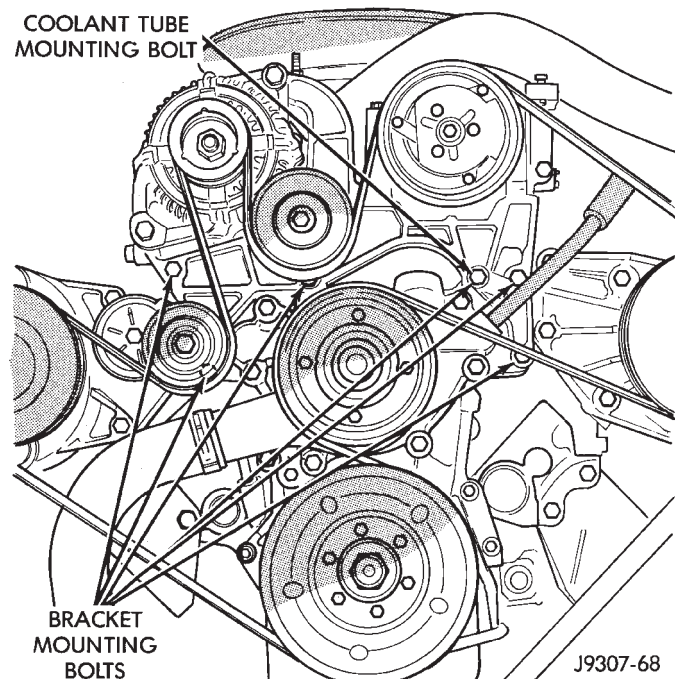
Bracket Bolts—5.9L HDC-Gas Engine
